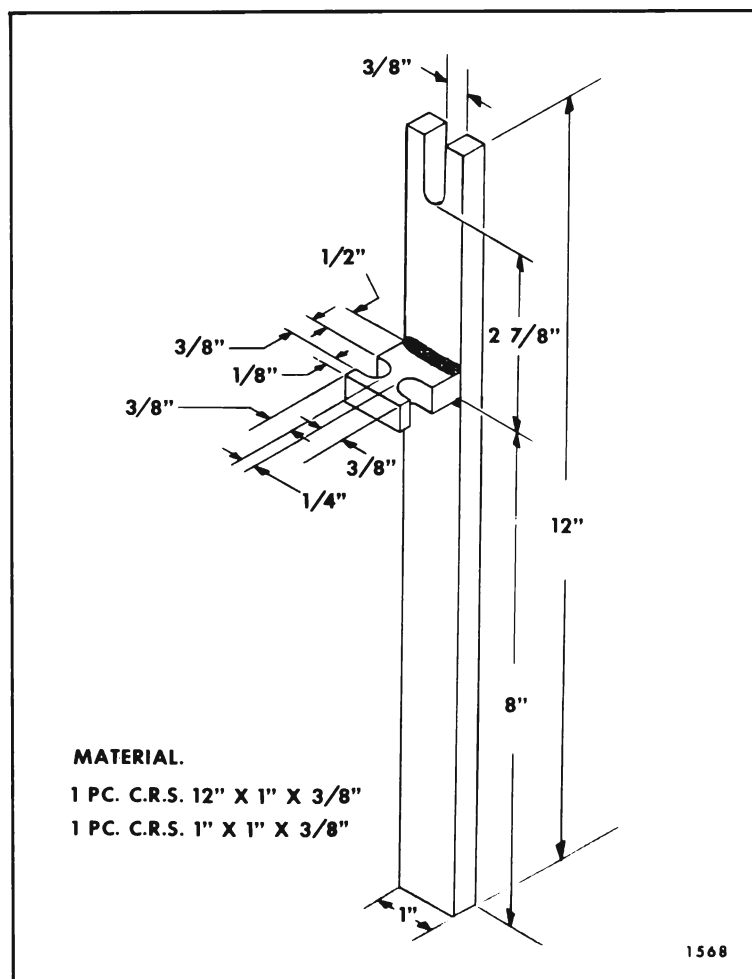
Rear Compartment Torque Rod Adjusting Tool
